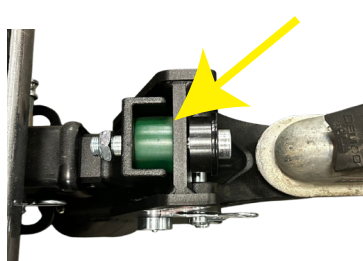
Truck side bump cushion compressed slightly showing proper air compression
